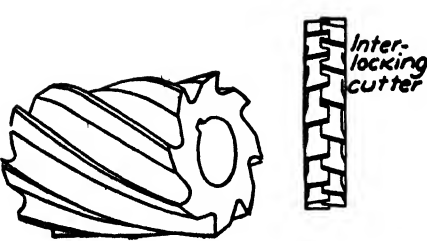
Plain Milling Cutter, Spiral Teeth.
